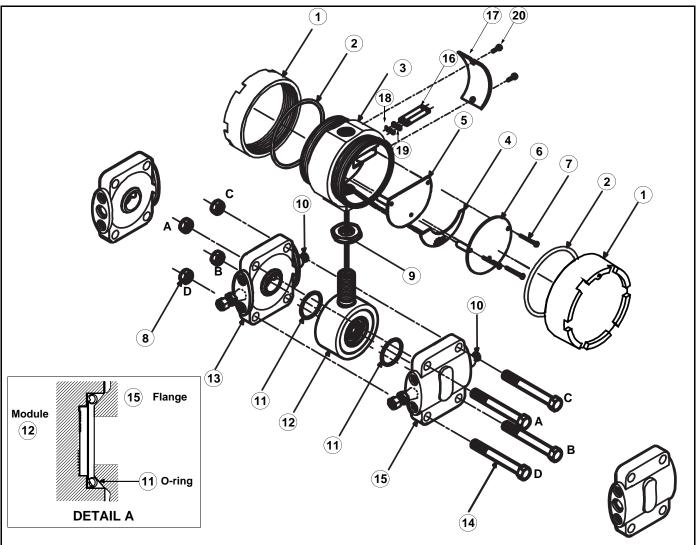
Typical Rosemount 1153 Series D Exploded View.
